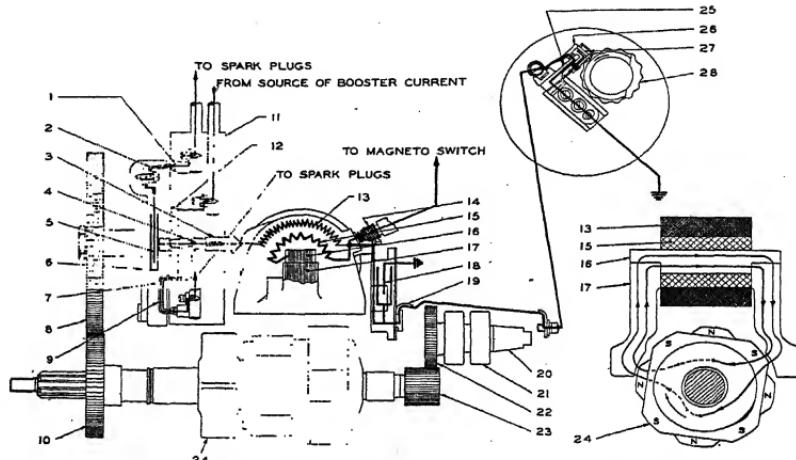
Diagram of Scintilla magneto types SF14L-3 and SF14LN-3.
